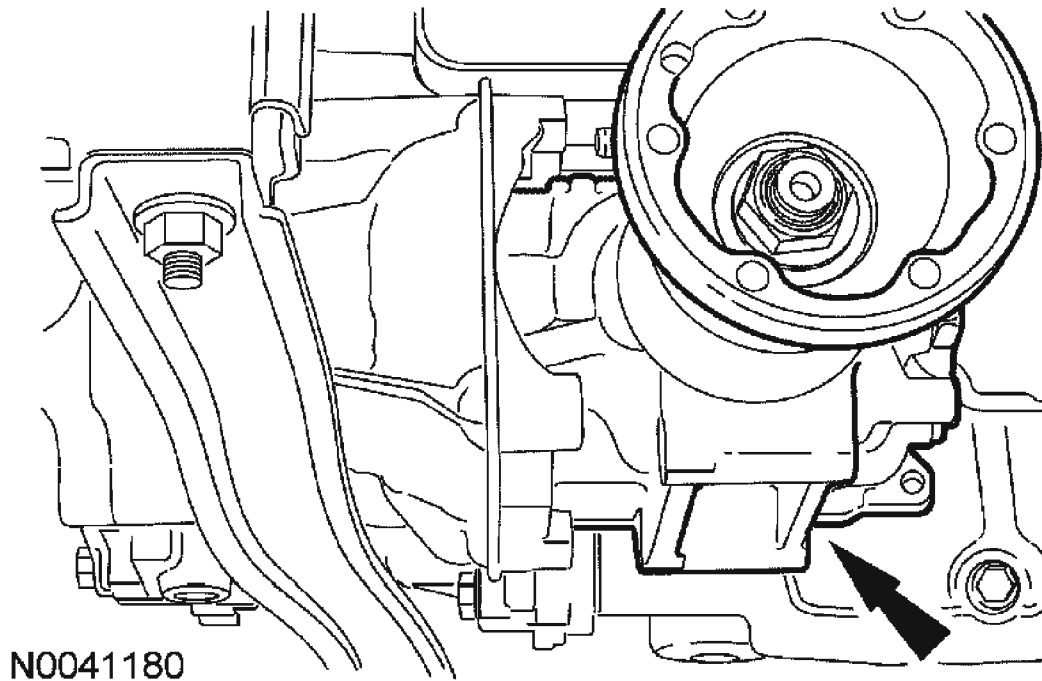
Removing Transfer Case-To-Transaxle Nuts
